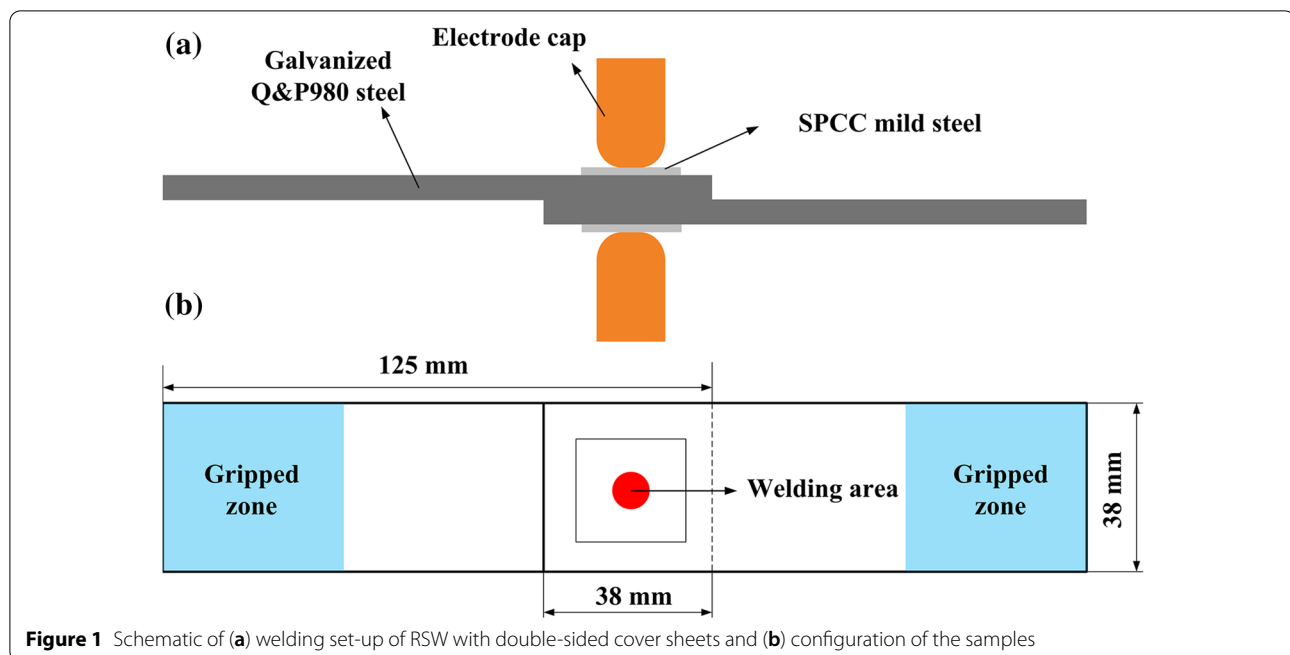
Schematic of (a) welding set-up of RSW with double-sided cover sheets and (b) configuration of the samples
